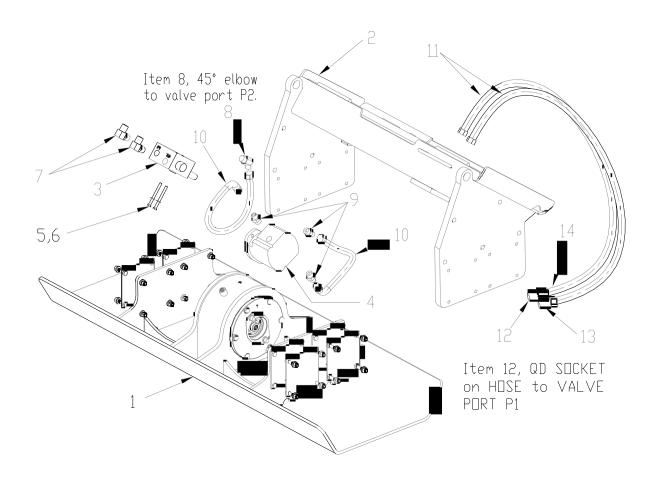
SSU Mounting Frame & Hydraulic Components - Skid-Pac 1000
